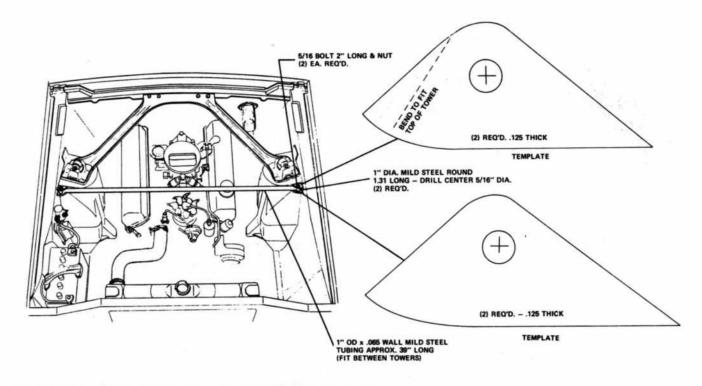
Spring Tower Cross Brace Fabrication Instructions.
